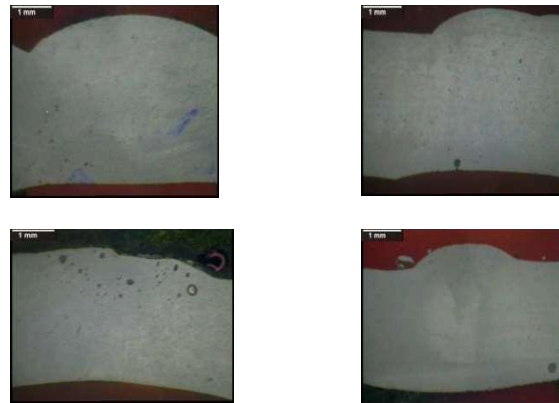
Optical microscopy image of the welded zone at the cross section of both sided TIG welded Aluminium samples with current setting of 140 A and welding speed(a) 3 mm/s (b) 3.5 mm/s (c) 4 mm/s (d) 4.5 mm/s
